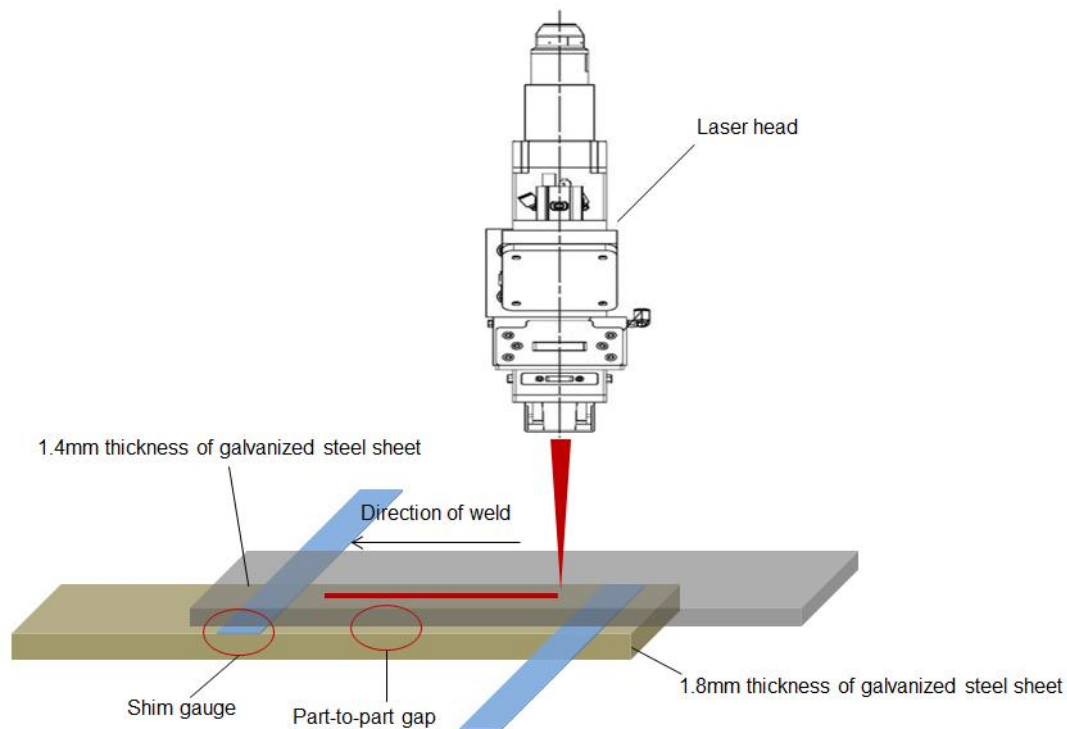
A schematic drawing of lap welding of fiber laser welding
